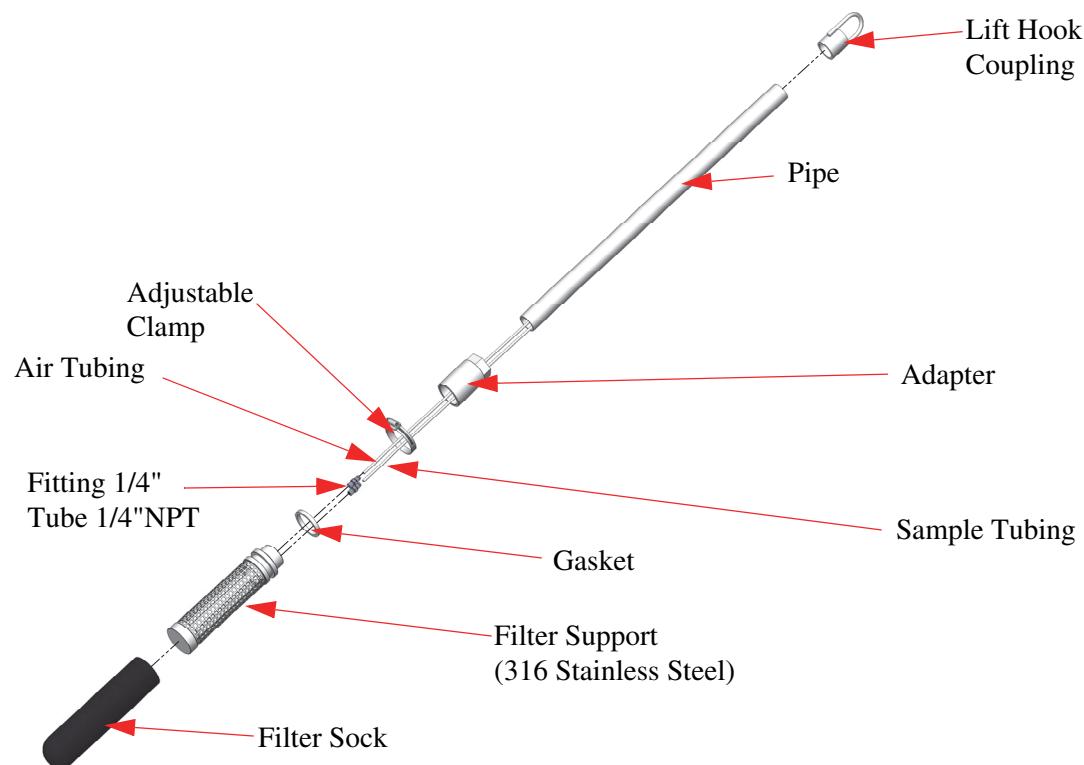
Exploded View of the CNSolution 9310 Filter Probe Assembly
